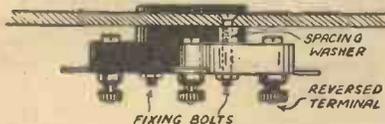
How to convert an ordinary valve holder into the chassis mounting type.
